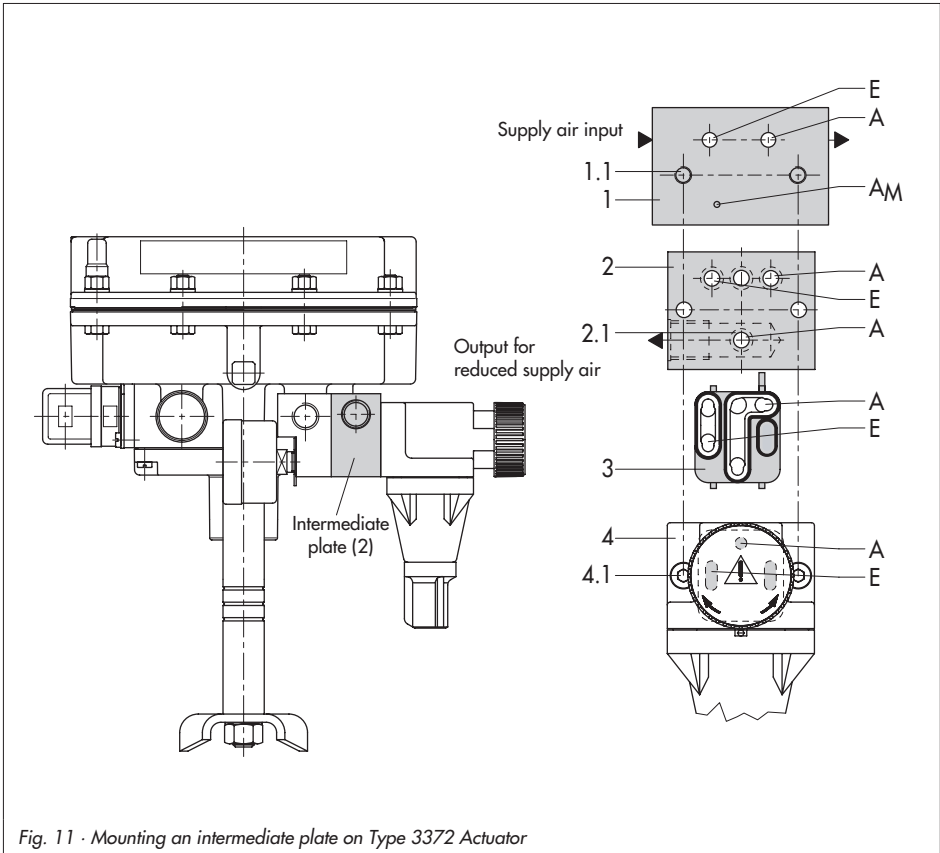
· Mounting an intermediate plate on Type 3372 Actuator
